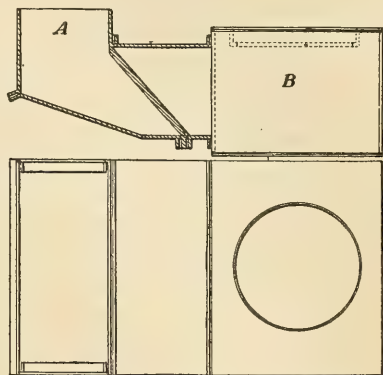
Bottom Chest for Blowing Cylinder.
